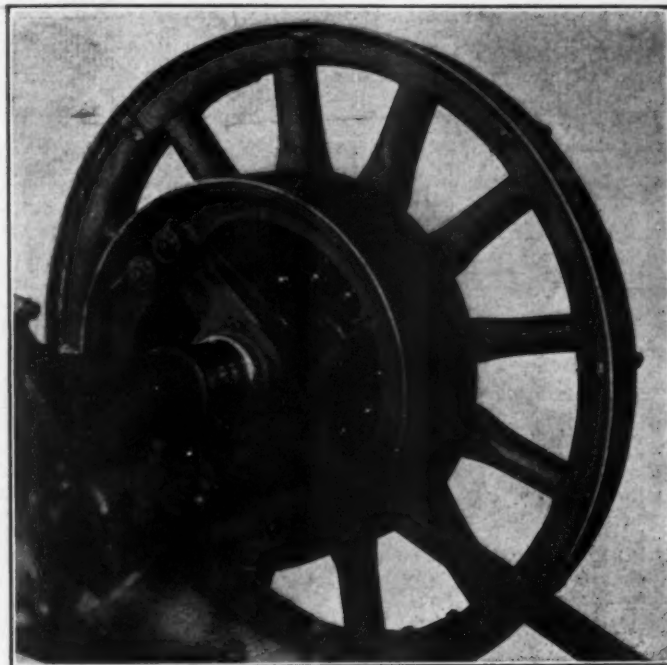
Rear brake drum, wheel, and details of holding brake mechanism
